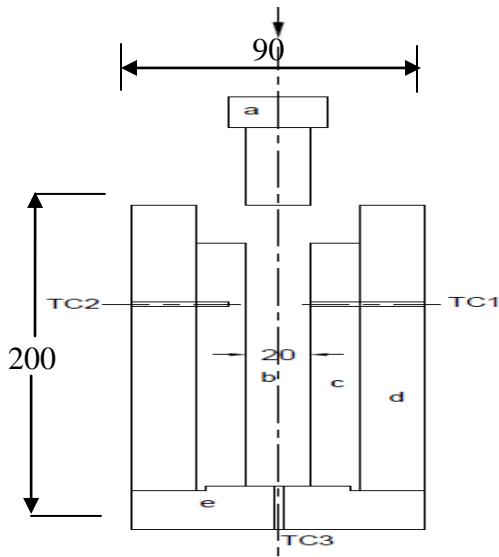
Schematic Diagram of Squeeze Casting Rig.
